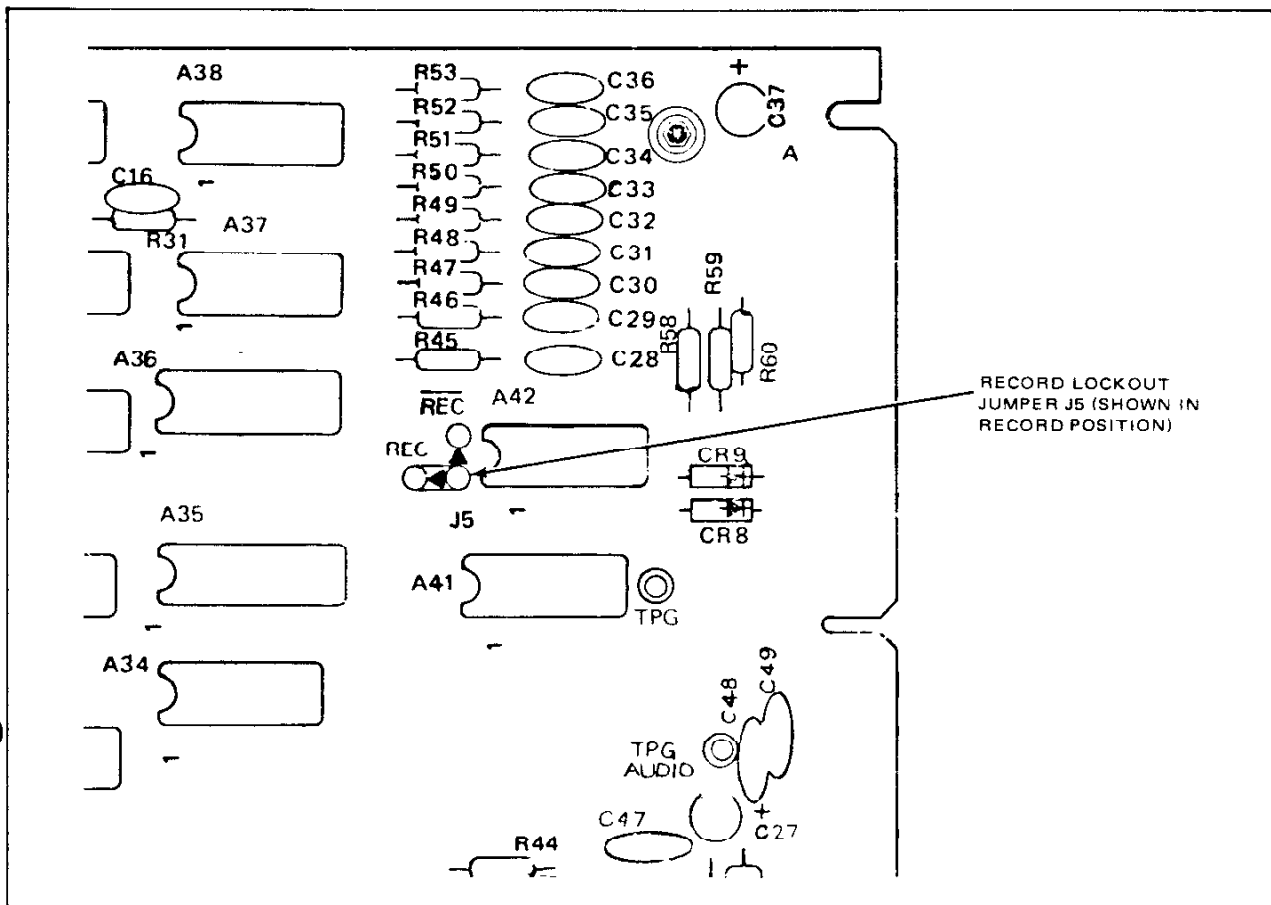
Record Lockout Jumper J5, Audio Control PWA No. 5
